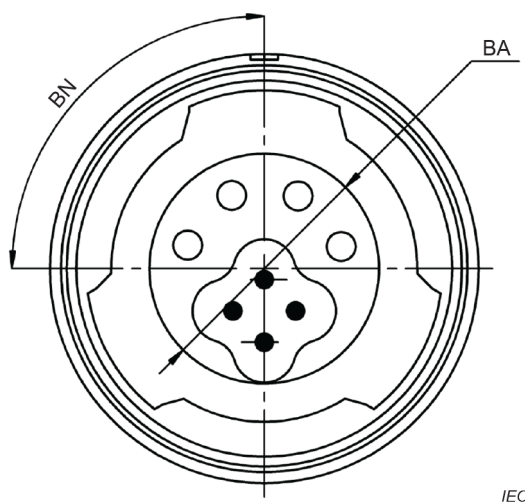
Front view of the female side of the push-pull housing for Type 2
